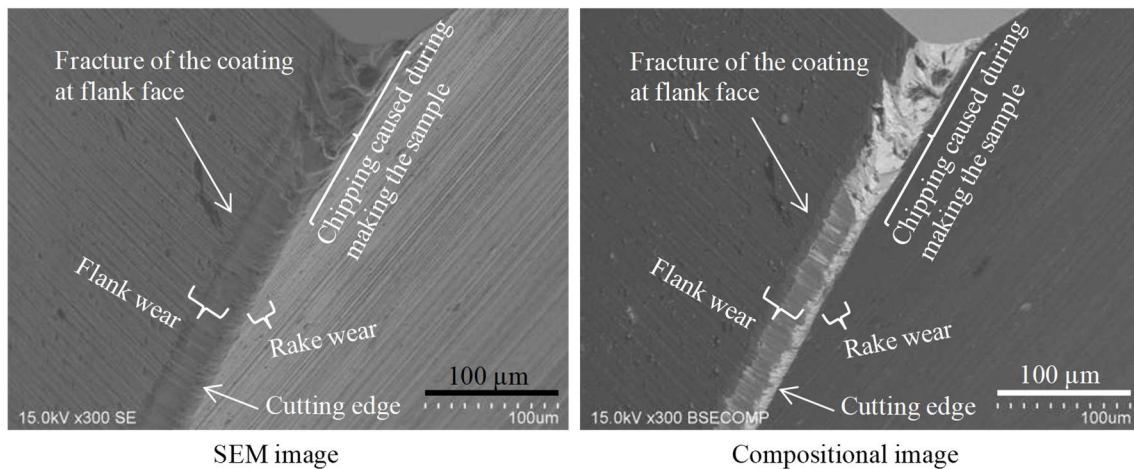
SEM and compositional images of the coated cutting edge after machining of Alloy 718. TiN coated end-mill tool, cutting speed $V = 40$ m/min, feed rate $f = 0.04$ mm/tooth, $a_p = 6$ mm, $a_e = 0.3$ mm, cutting length $L = 0.2$ m, coating thickness: $2 \mu\text{m}$.
